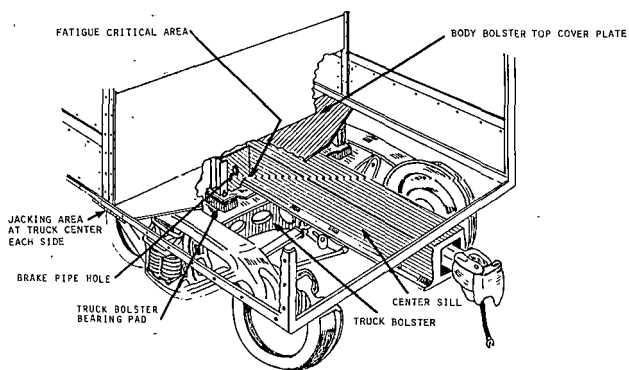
TYPICAL VIEW OF FABRICATED CENTER SILL/ LOWER BODY BOLSTER INTERSECTION.
